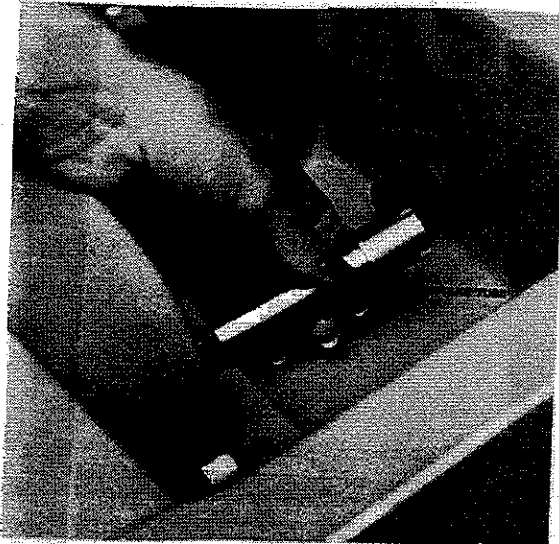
REMOVAL OF AIR INTAKE TUBE
